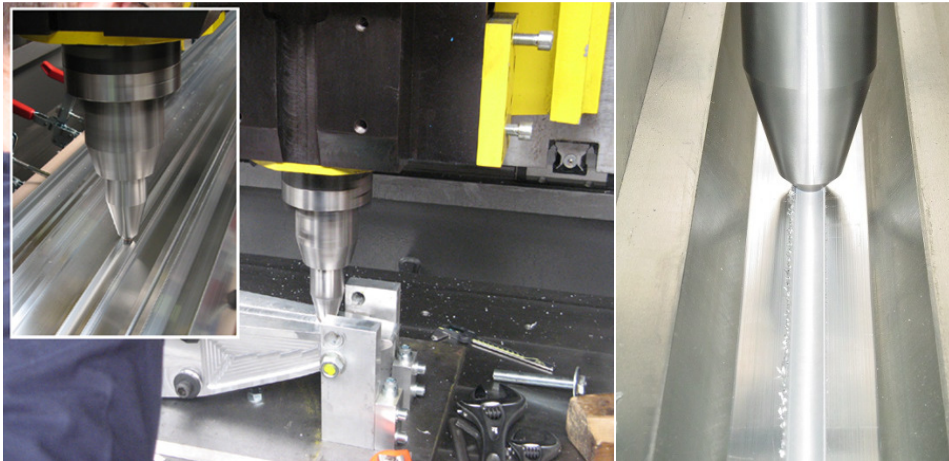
Friction stir welding equipment (Source: CEWAC)
